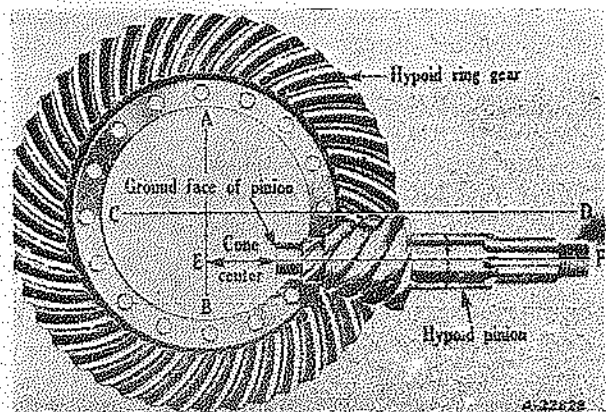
Illustration shows location of pinion in relation to centre line of ring gear. Centre line of pinion is below centre line of ring gear.
